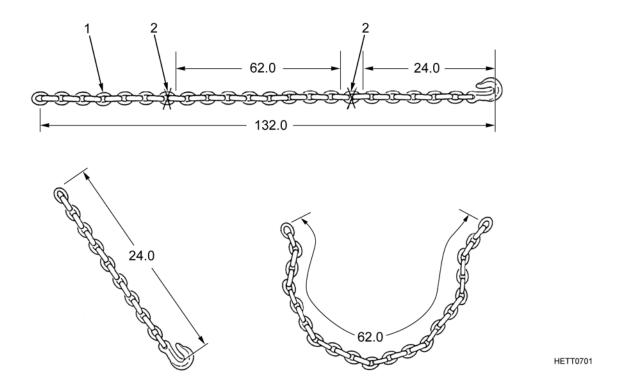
HYDRAULIC CONTROL MODULE REMOVAL/INSTALLATION CHAIN SET (SW34435)
